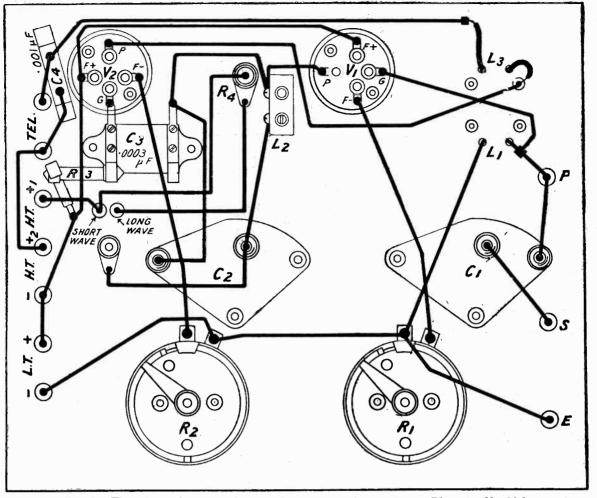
The wiring diagram, showing the necessary connections. Blueprint No. 90 b.
